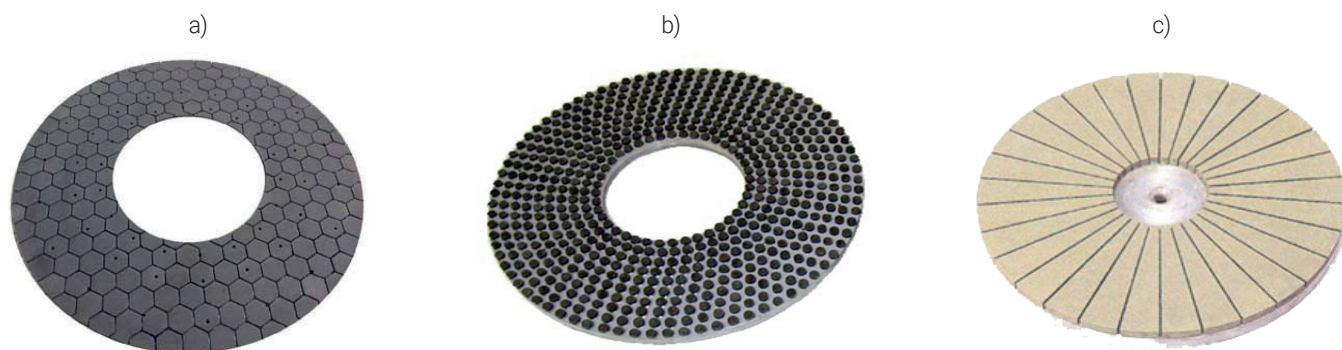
Segmental grinding wheel of machining on lapping machines [1, 18]
